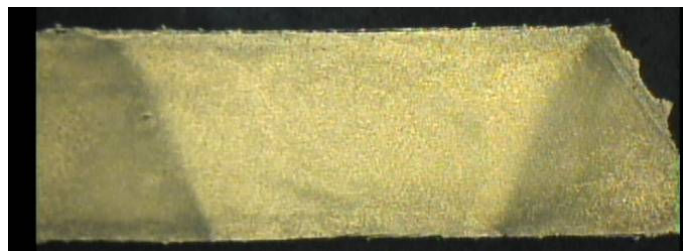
Marco section from  $\frac{1}{4}$  inch threaded tool, example 1.
